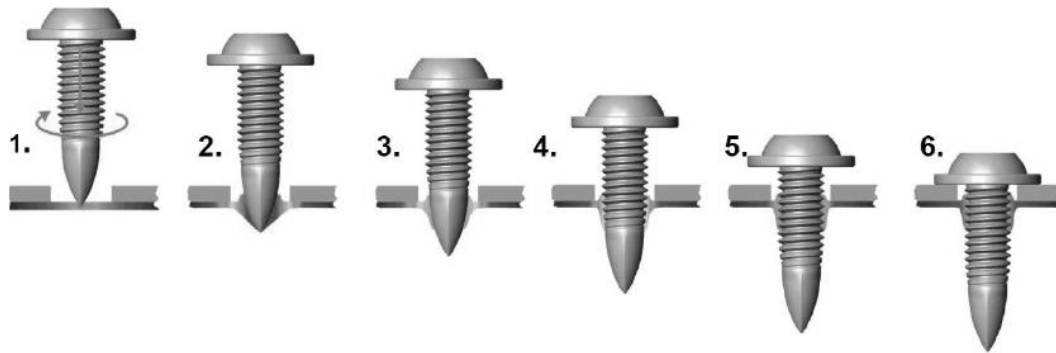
Assembly process of a self-tapping screw [36], [92]
